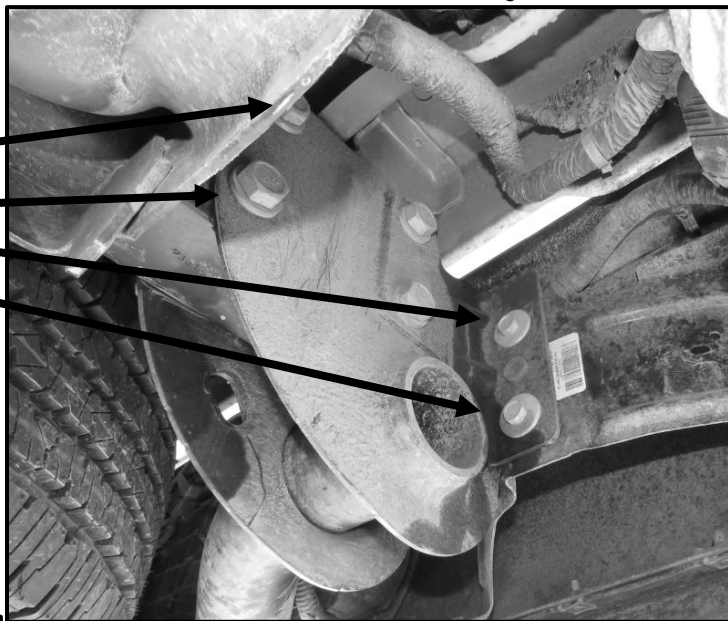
Starting at the rear DS remove the (4) OEM Hex Bolts
